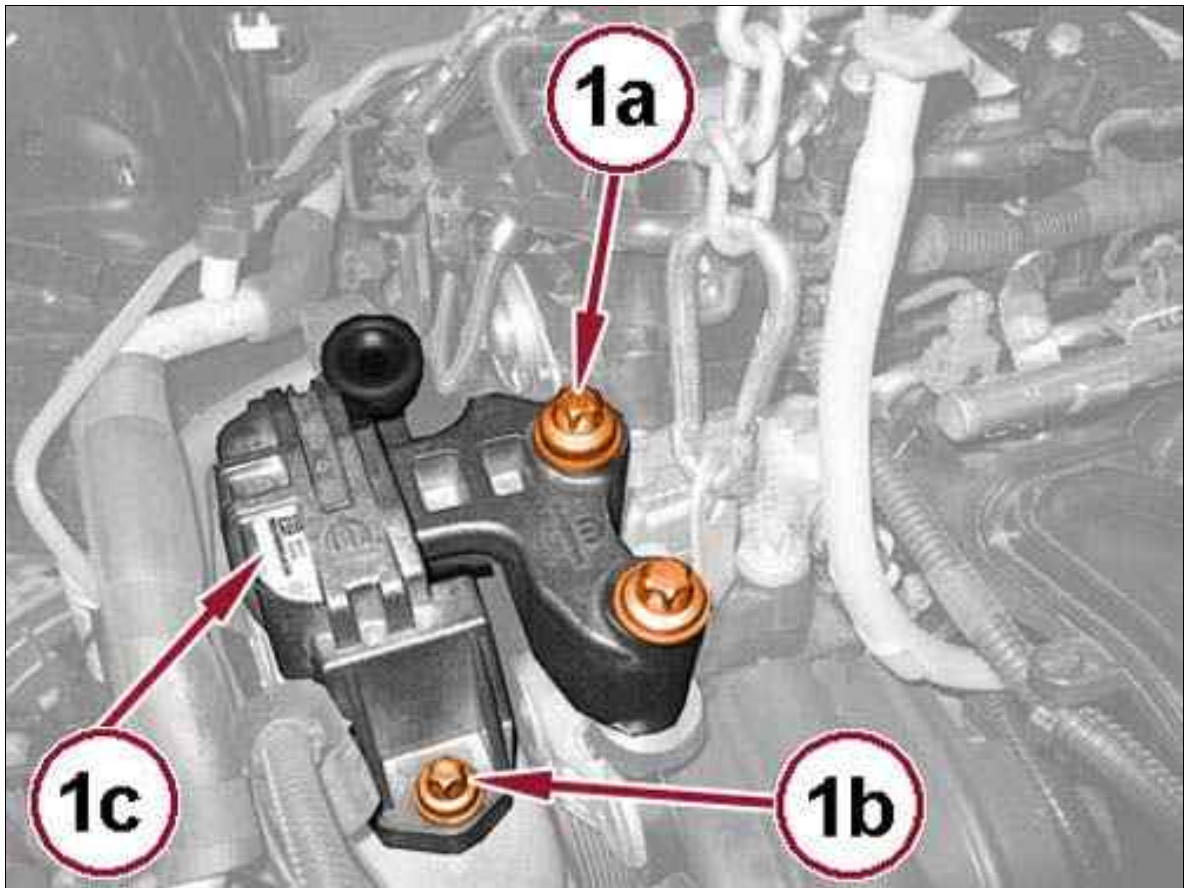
Power Unit Support Flexible Mounting (Gearbox Side) & Bolts
